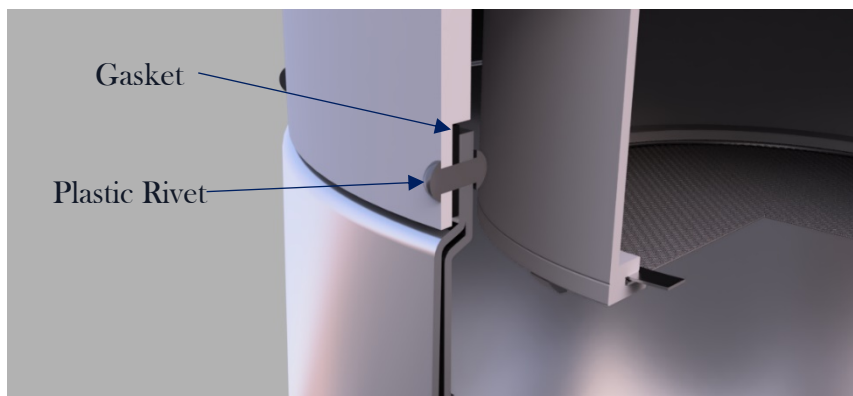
CAD render of the gasket used to seal the join between the top casing and casing subassemblies
